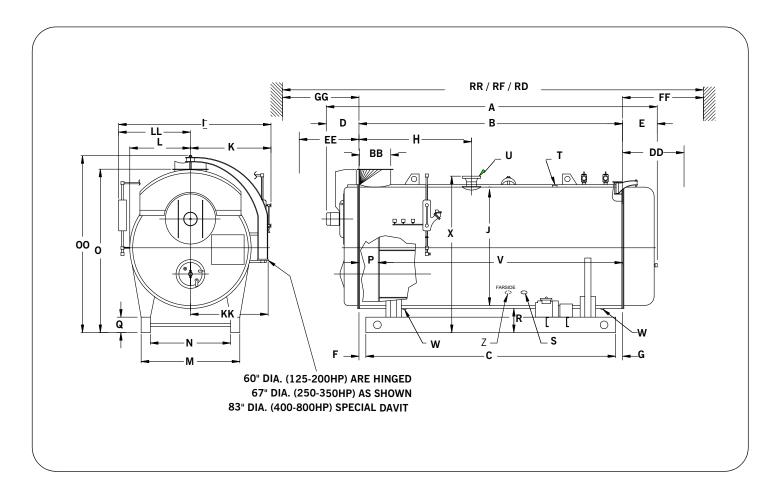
Model CBR Steam Boiler Dimensions and Weights - Sheet 1 of 2
